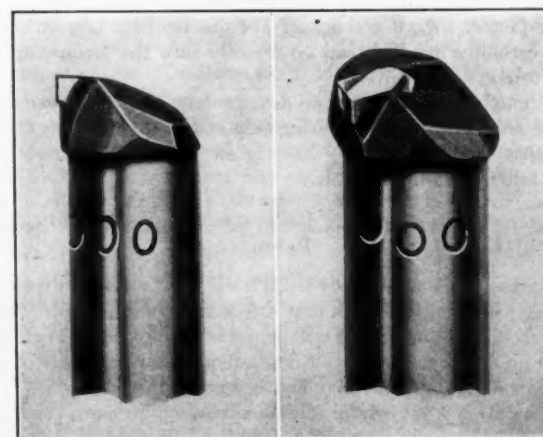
TOP AND PERSPECTIVE VIEWS OF COMBINED BORING AND FACING TOOL
